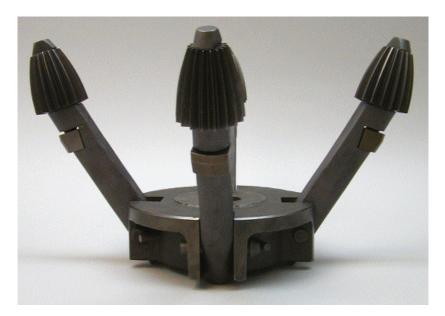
Cleaning Head Fully Opened – 13-in. OD
